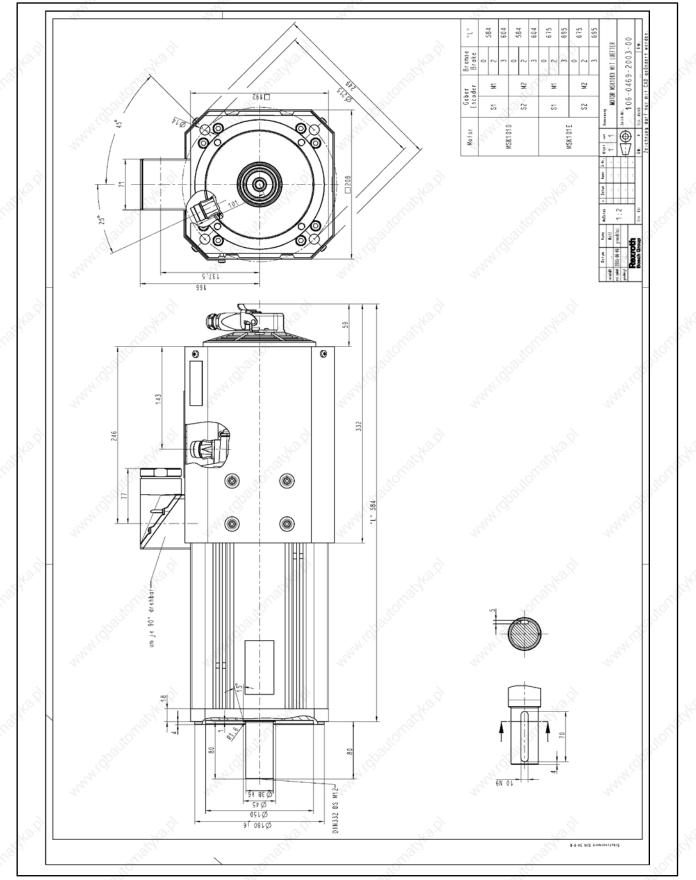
Dimension sheet MSK101 with axial fan unit
